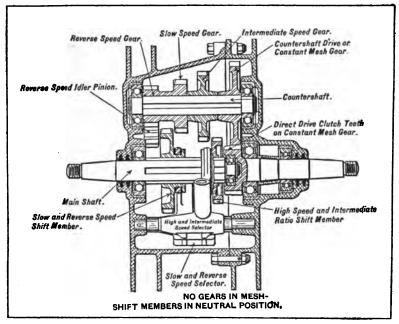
Sectional View of Three Speed Selective Gearset, Showing Position of Sliding Gear Members When Control Lever is in Neutral Position.
